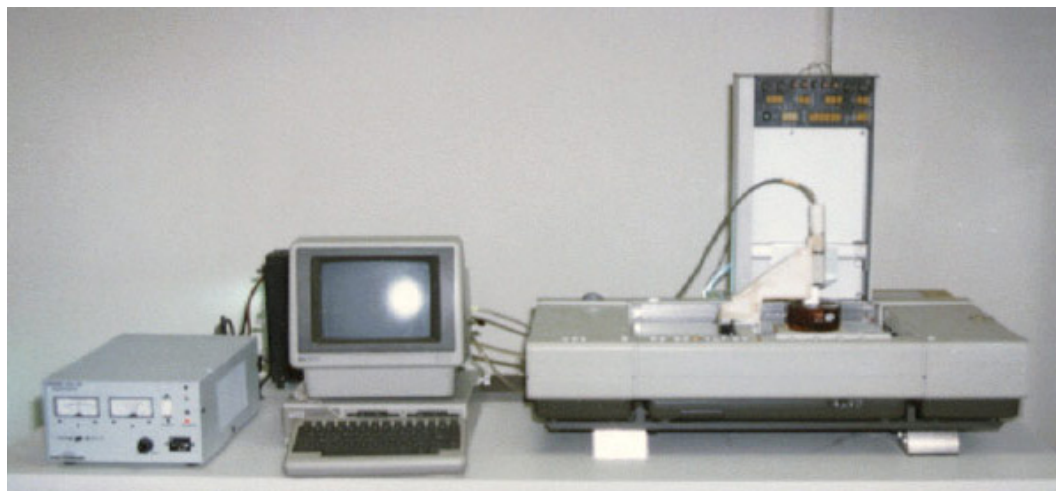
The first 3D printer. A stereolithography machine invented by Chuck Hull in 1983. The machine solidified layers of liquid photopolymer to form 3-dimensional objects [12].
